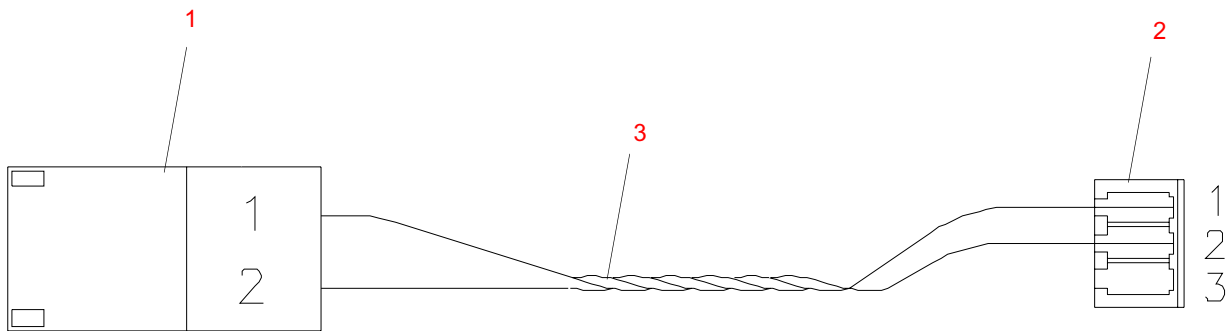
Gobo Interconnect PCB/Cable Assembly
